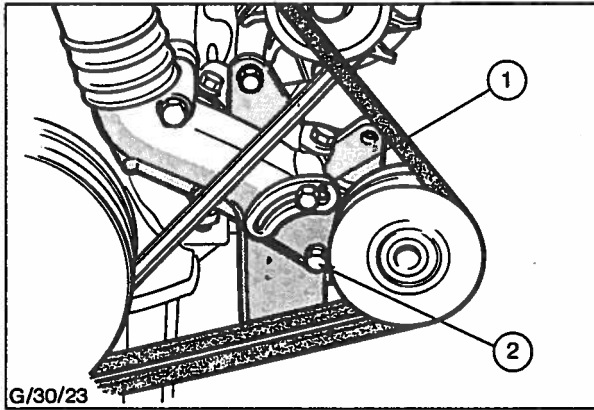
Drive Belt Adjustment - 'Low-Loss' Fan Drive Water Pump
